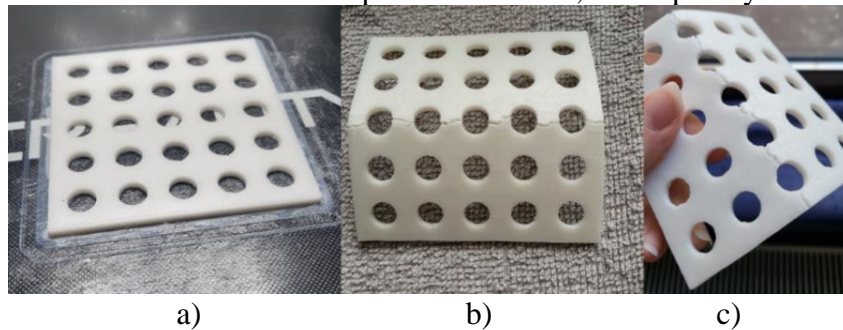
Sample with holes: a) 3D-printed sample located on the printer bed; b) sample after the first thermoforming; c) sample after the second thermoforming.
